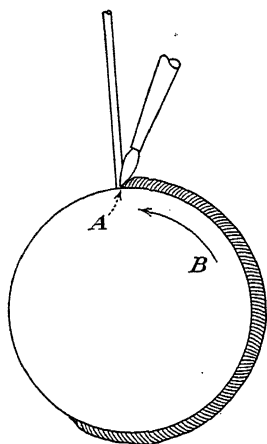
Position of rod and torch to complete weld. A, weld puddle; B, direction of welding.
